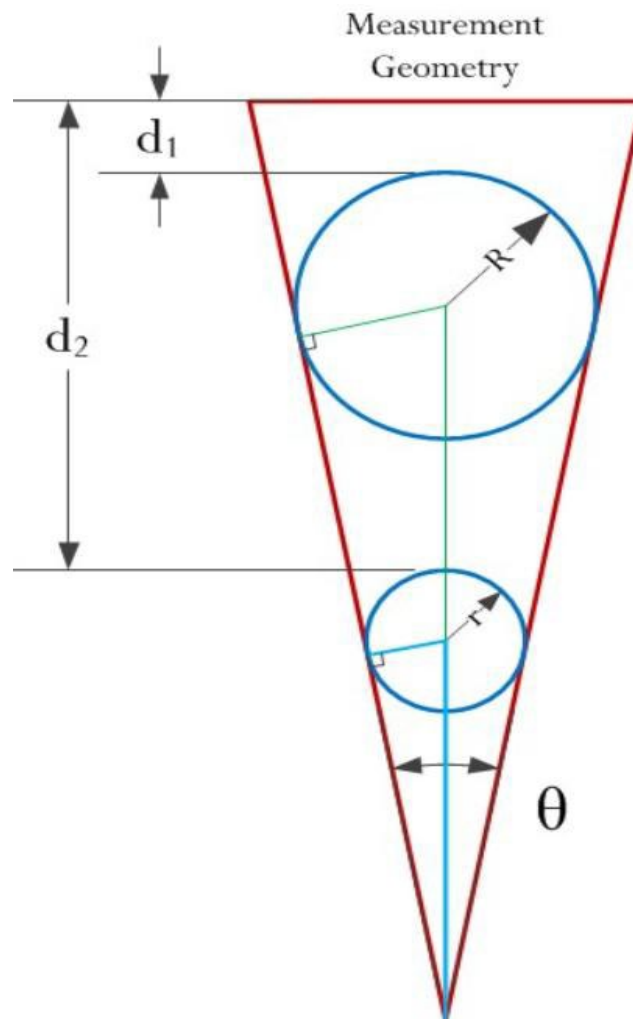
Measurement Geometry of 2 Ball Angle Measurement Technique.
